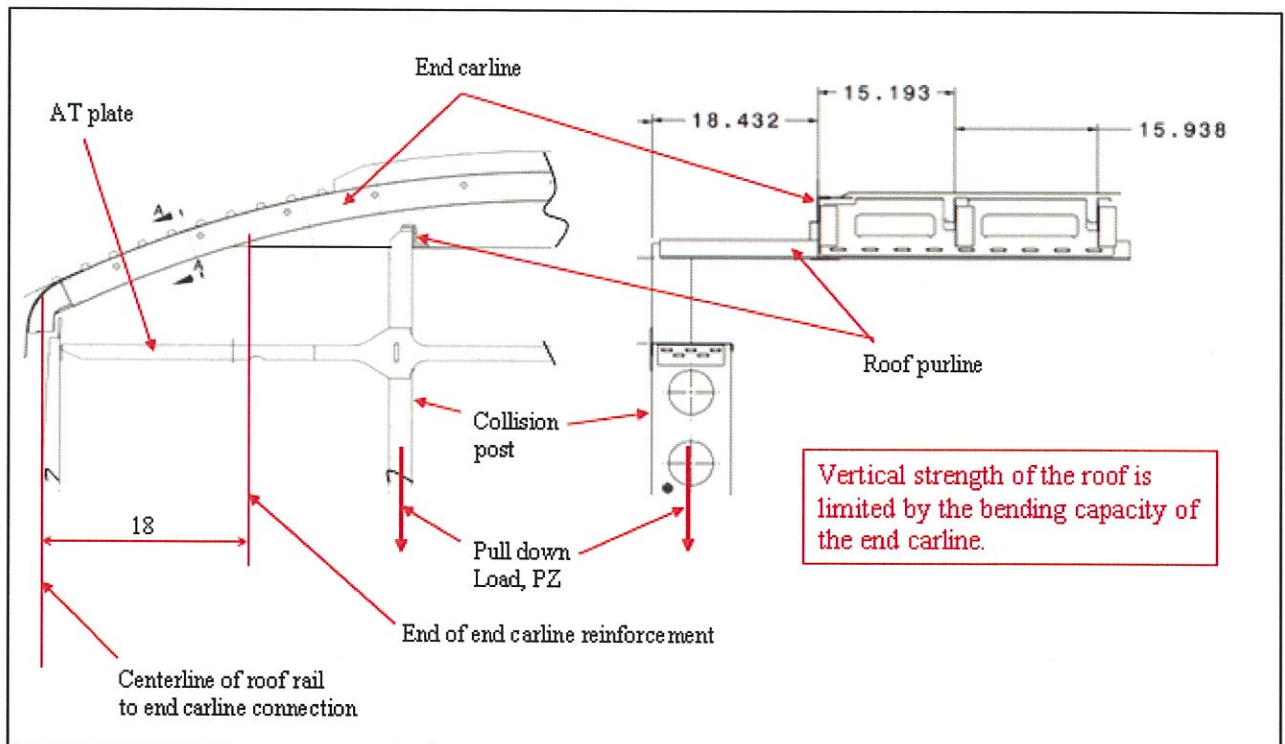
, End no. 1 post to roof connection arrangement
